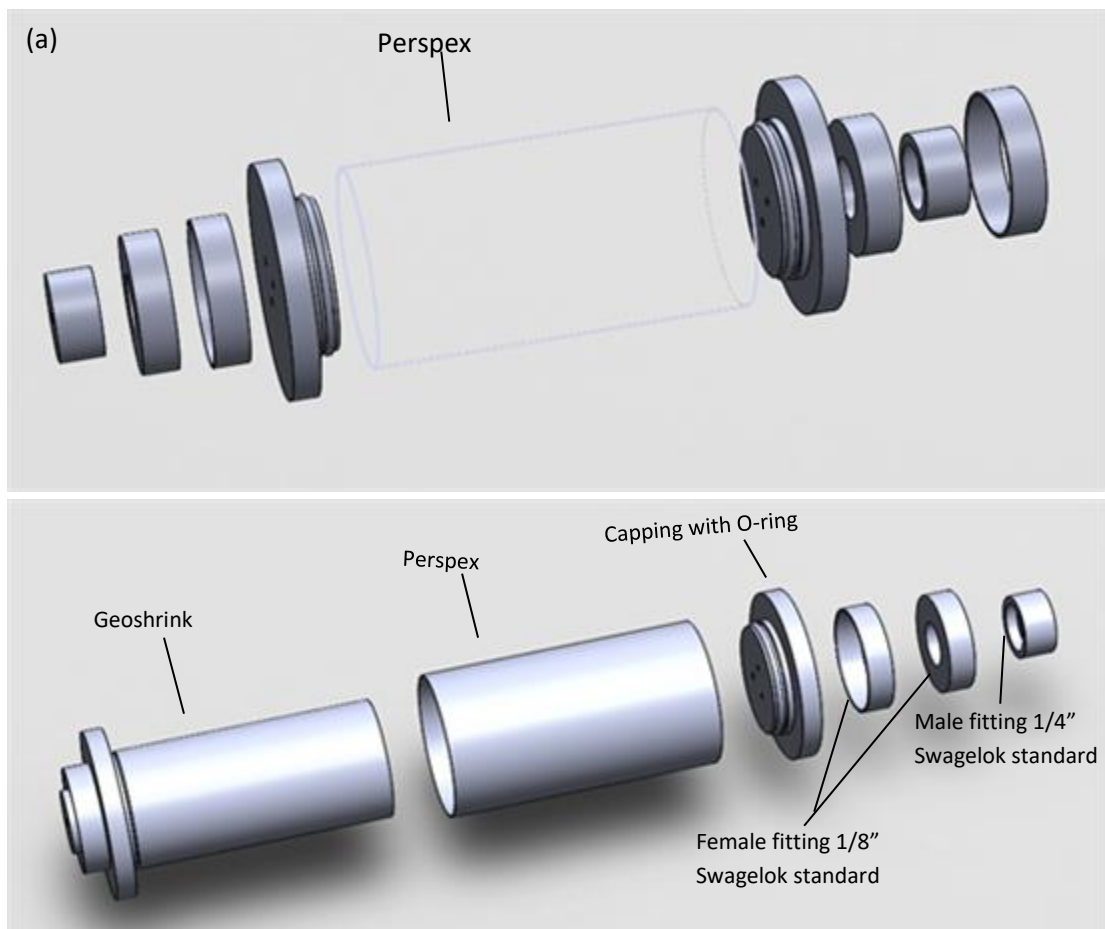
Designed Perspex core holder showing: (a)-(b) component.
